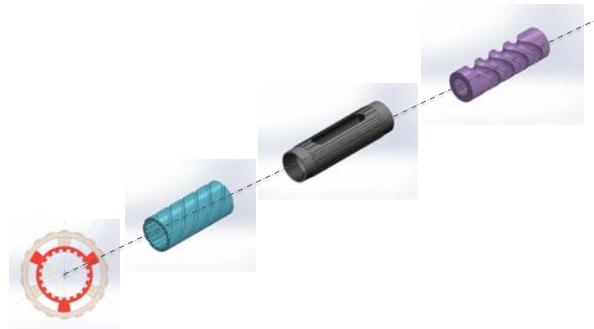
Rotary Piston Module Design with rotary piston, power screw, ring, & harmonic drive.⁴
